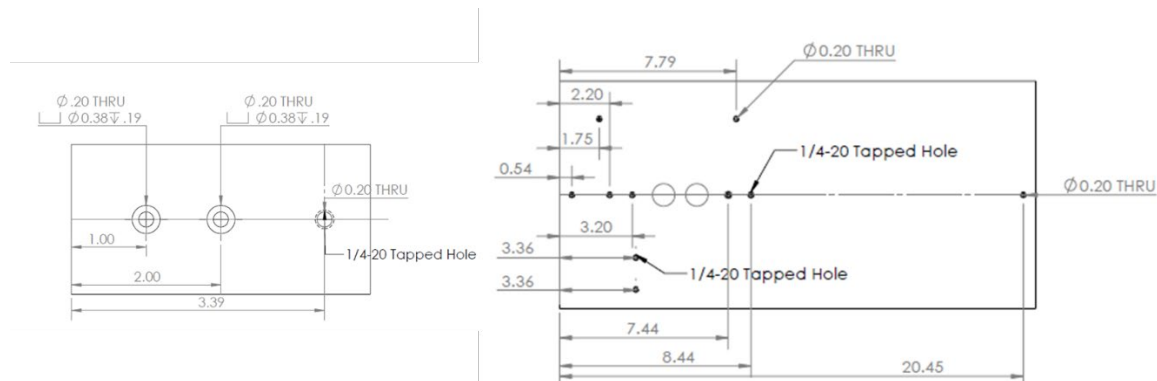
SolidWorks drawings of holes to be machine on (left) the mirror plates and (right) the base plate.
